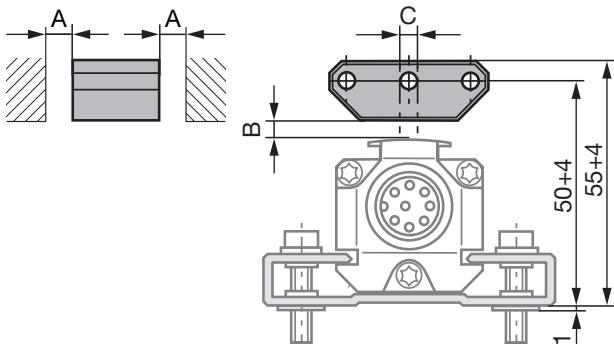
Dimensions and distances with BTL5-P-3800-2 magnet
